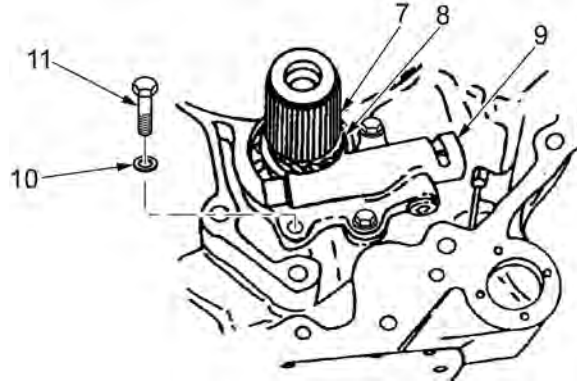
Governor Body Assembly and Governor Drive Gear Removal.
